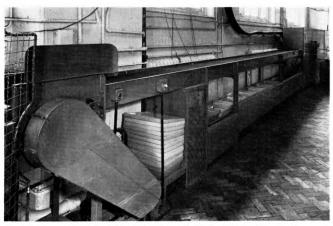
THE LOADING CONVEYOR WITH STORAGE CONVEYOR UNDERNEATH
